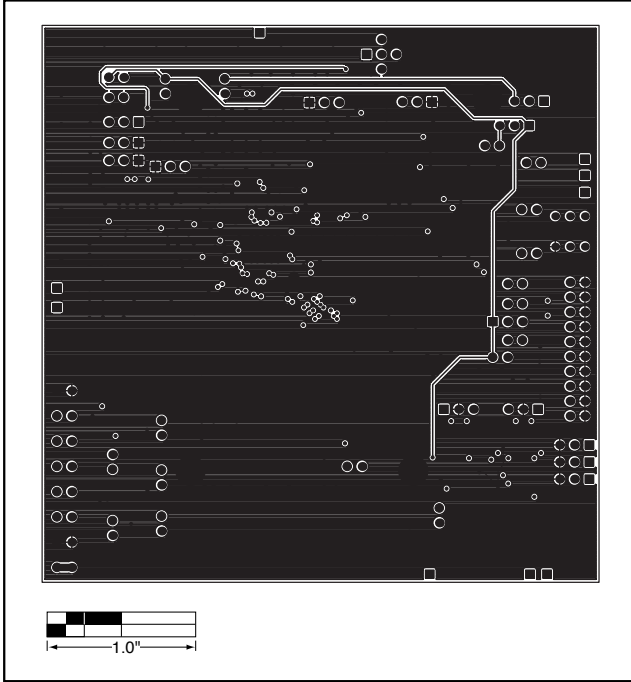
MAX256\_/MAX257\_ EV Kit PC Board Layout—Inner Layer
